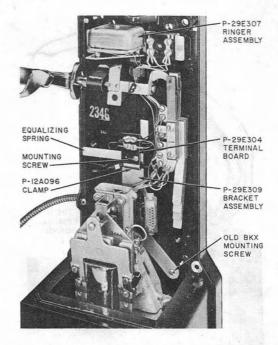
Backplate Assembly With D-180120 Kit of Parts Installed
